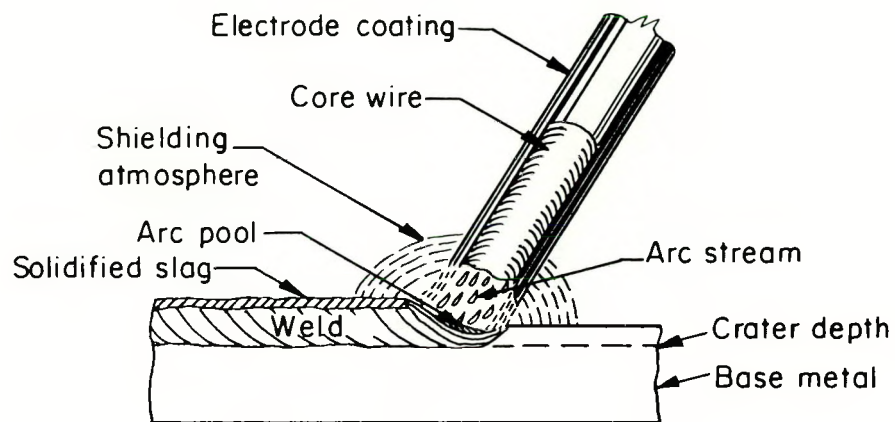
SKETCH OF SHIELD-METAL-ARC WELDING OPERATION
